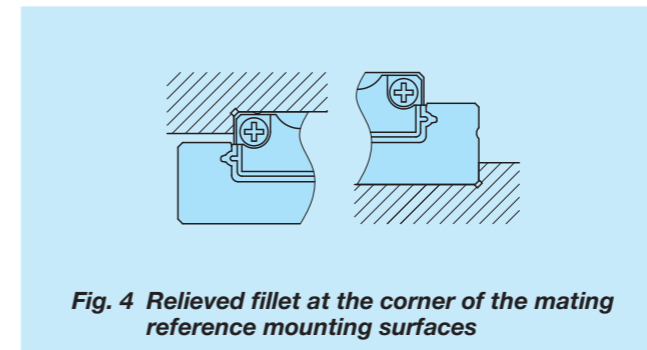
Relieved fillet at the corner of the mating reference mounting surfaces
